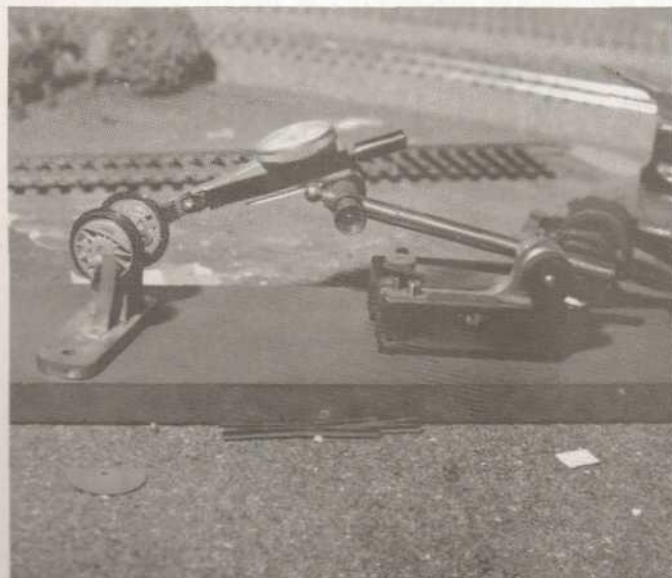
The driver quartering jig is shown with a wheelset mounted for measurement with the surface gauge.
